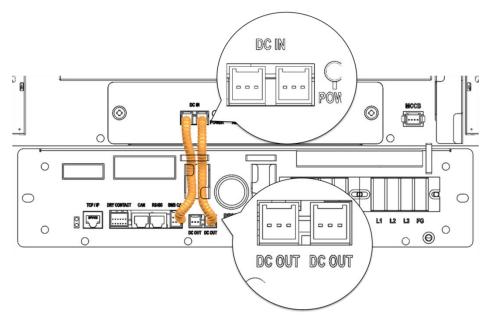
DC Power Cables from SMPS Assembly Type A to Switchgear
